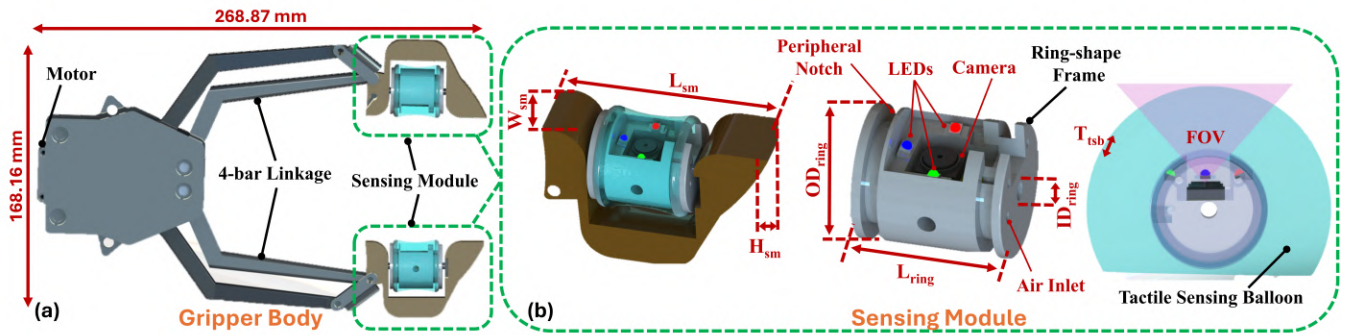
Design overview of the INTACT-GRIP: (a) Gripper body, (b) Close-up view of the sensing module incorporating ring-shape frame and TSB.
